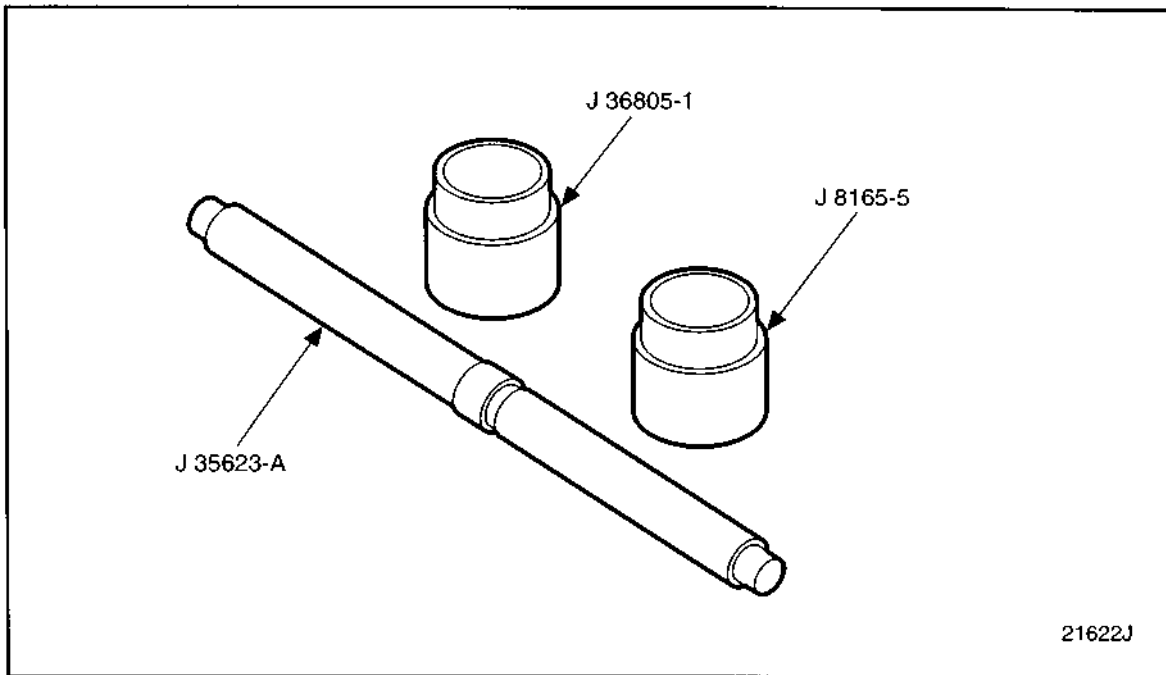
Valve Seat Grinder Adapter Kit, 60,J 36805
